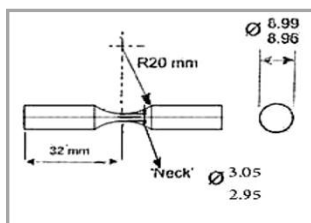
Schematic diagram for fatigue specimen (SM1090 rotating fatigue machine user guide, 2009)
